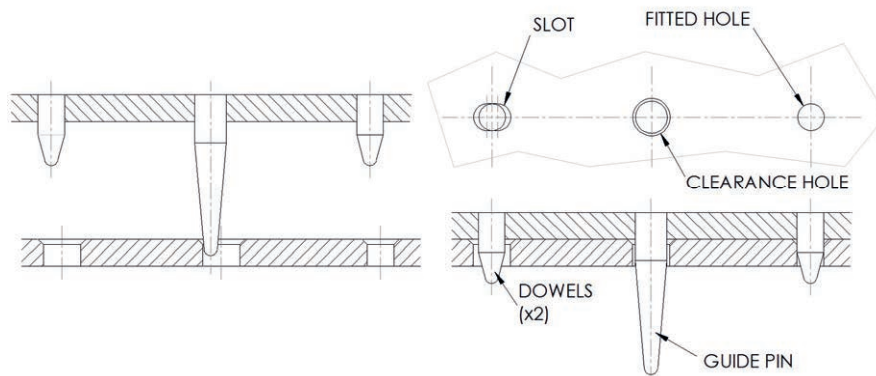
Operating principle of guide pins. Left: before alignment. Right: interfaces correctly mated.
